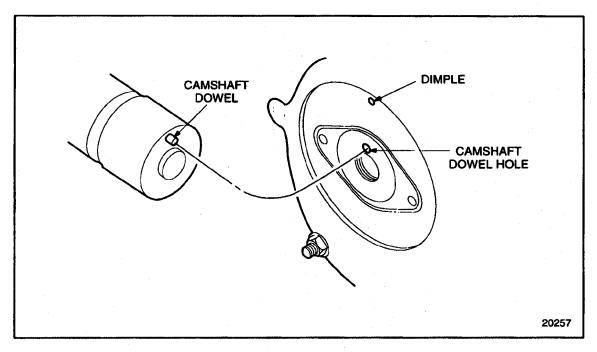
Camshaft Thrust Plate and Dowel Pin Location
